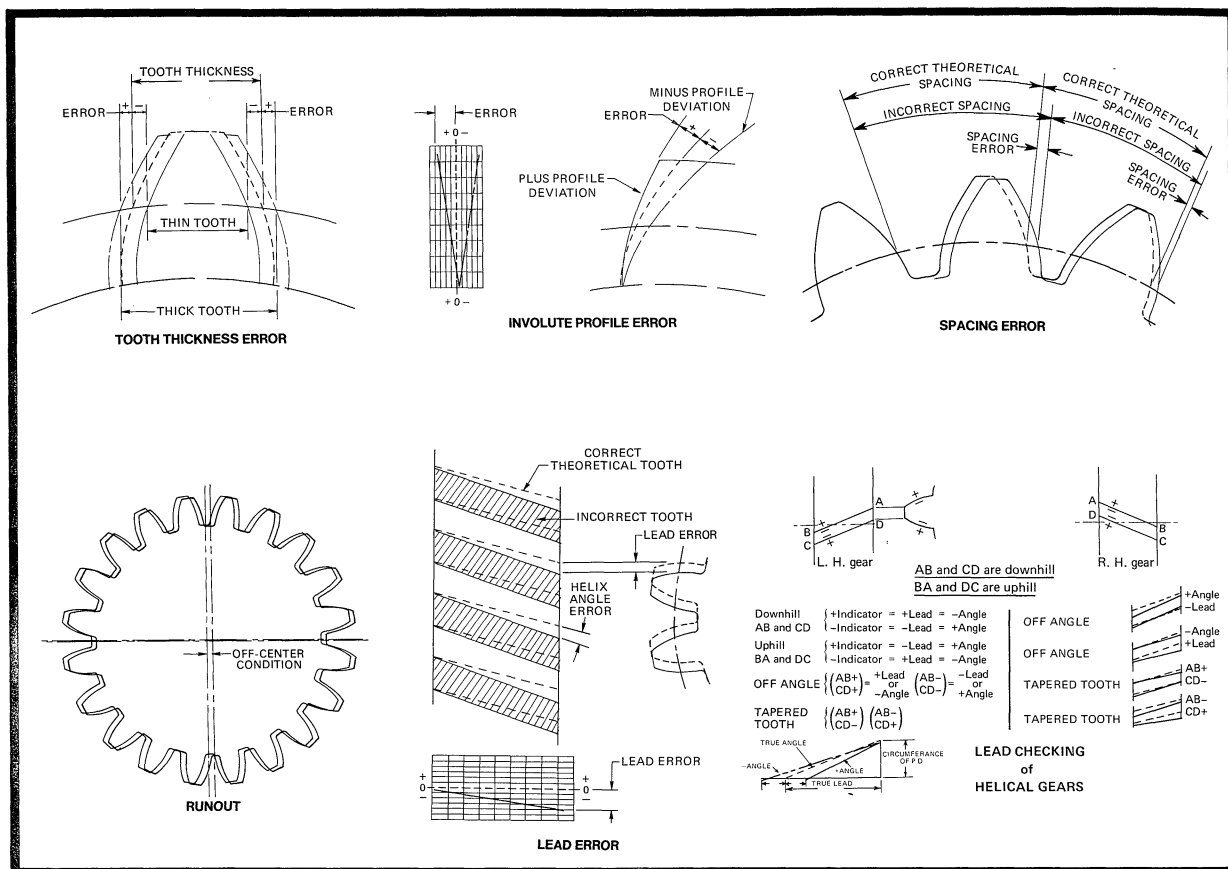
Typical errors for gear teeth for which tolerances must be established and inspection measurements made.
